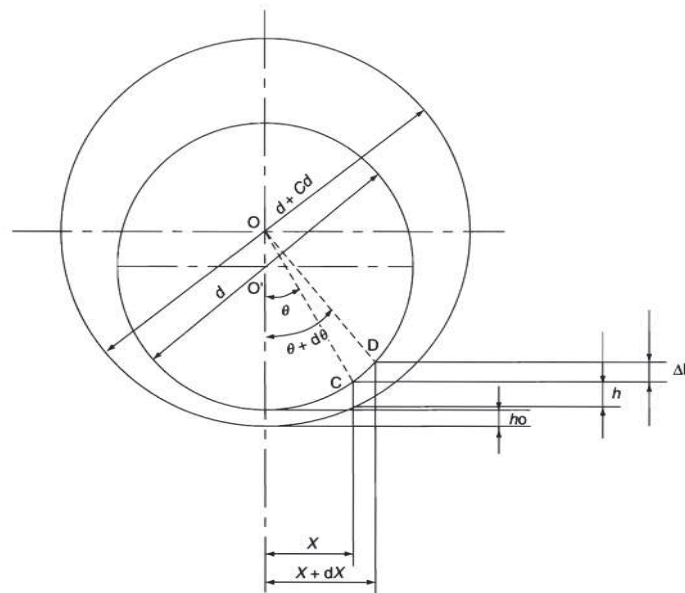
The configuration of the shaft in the hydrodynamic journal bearing [2]
